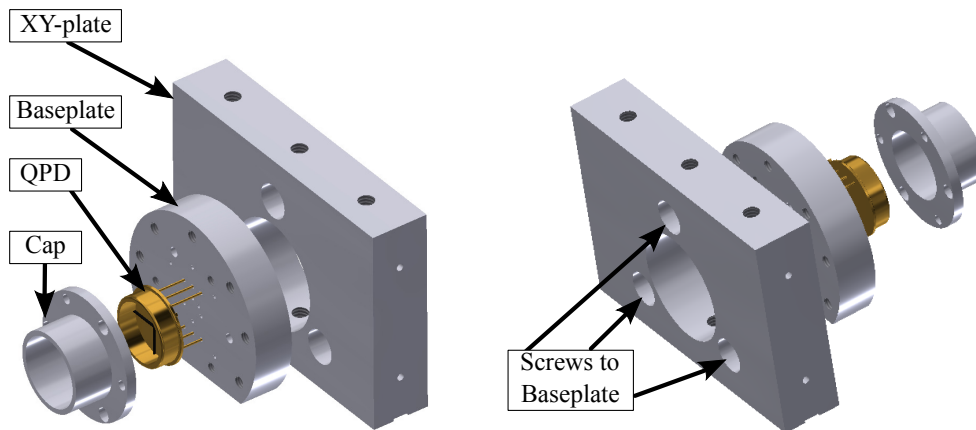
Assembly of the used quadrant photodiode. The assembly is mounted to the Central Optical Bench via an adapter plate (not shown).
